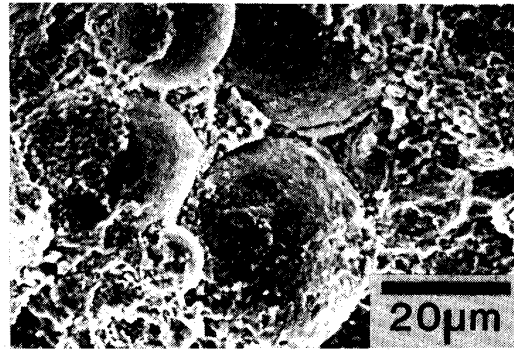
Part of fracture surface from as-HIPed specimen a, depicting poorly bonded powder grains.
